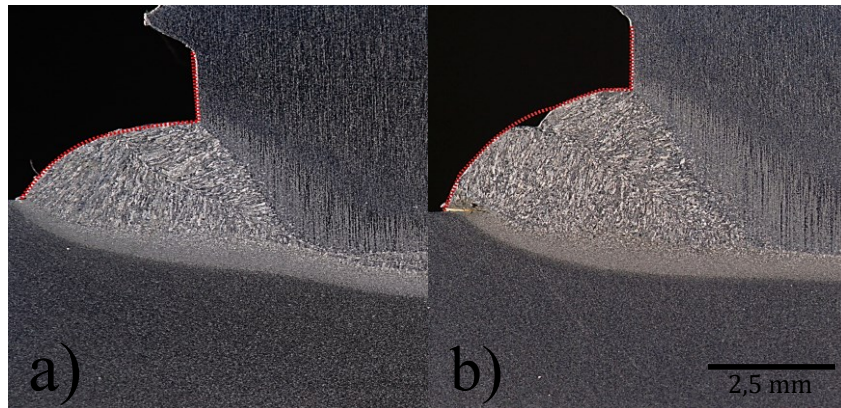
Welding Collar Formation a) Collar formed with pure helium, b) Collar formed with pure argon
